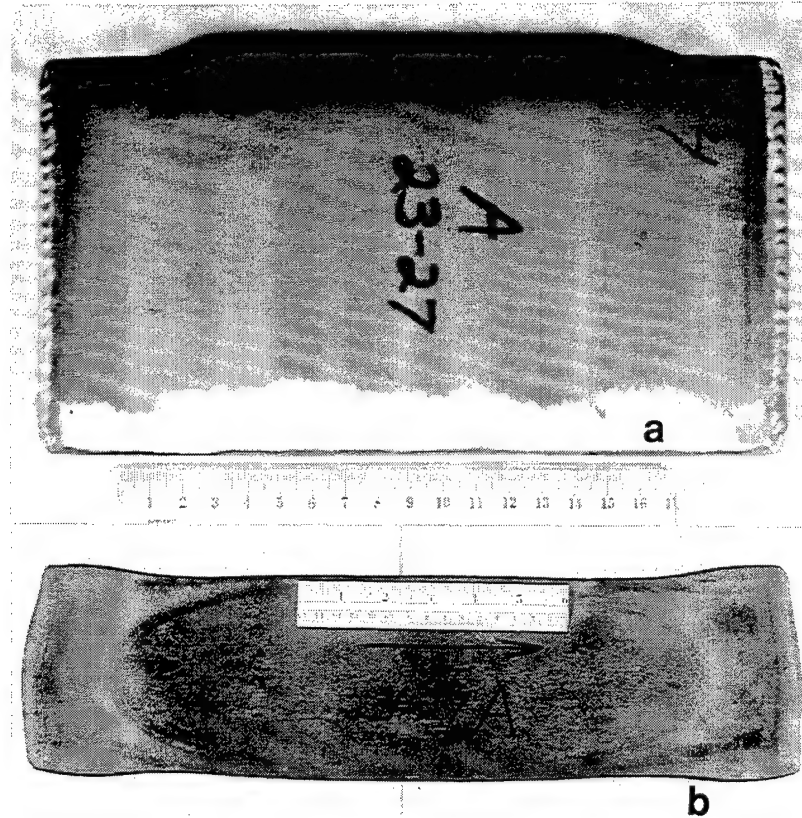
The (a) can assembly prior to rolling and the (b) extracted workpiece after rolling for Ti-23Al-27Nb.
